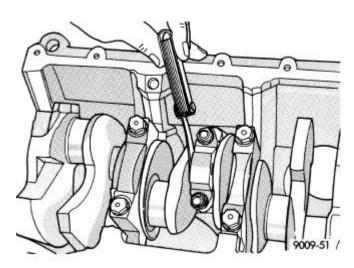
Measuring Gap Between Connecting Rod & Crankshaft Journal Flange Courtesy of CHRYSLER GROUP, LLC
